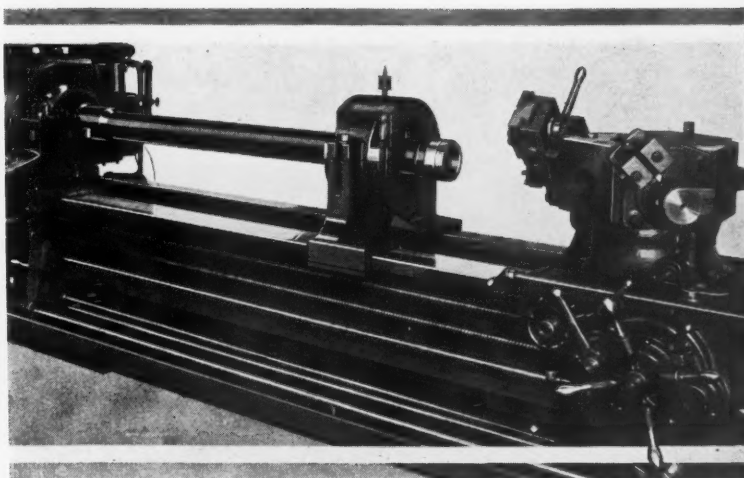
Machining Hydrant Pipe Stand on an International Machine Tool Co.'s Libby Turret Lathe. Production Increased from 9 to 30 Pieces a Day—The Pipe is Chucked on an Air-operated Mandrel
